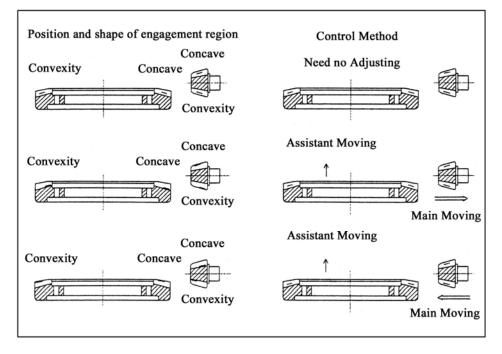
Control method of engagement region f. Adjustment of Flank Clearance
